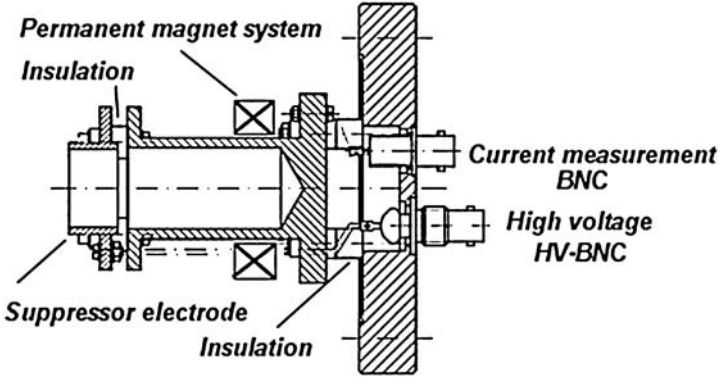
Construction drawing of a simple Faraday cup without cooling, mounted on a CF flange [33]
